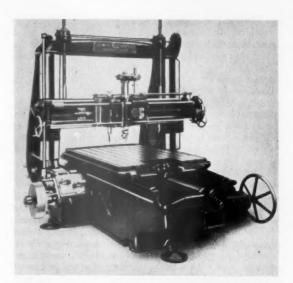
Large jig boring machine 52" x 40" showing auxiliary high speed spindle.
